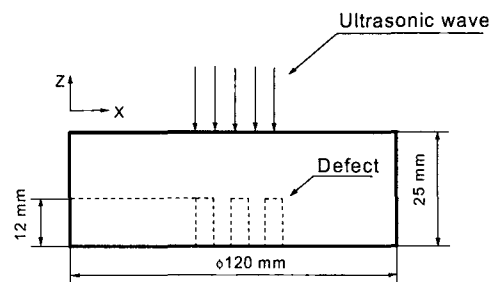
Geometry and dimension of specimen for ultrasonic inspection
